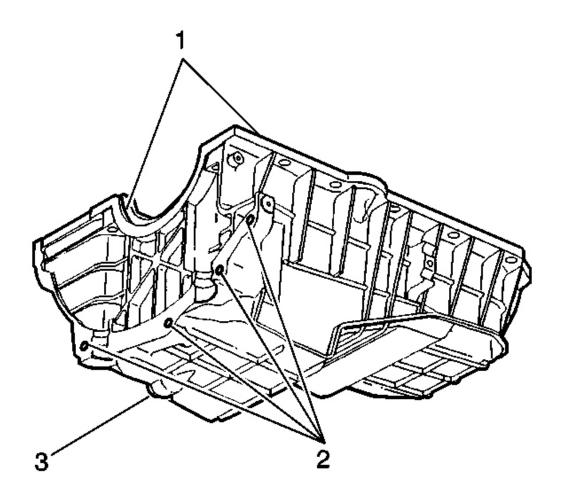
Oil Pan Cleaning & Inspection Areas Courtesy of GENERAL MOTORS CORP.
